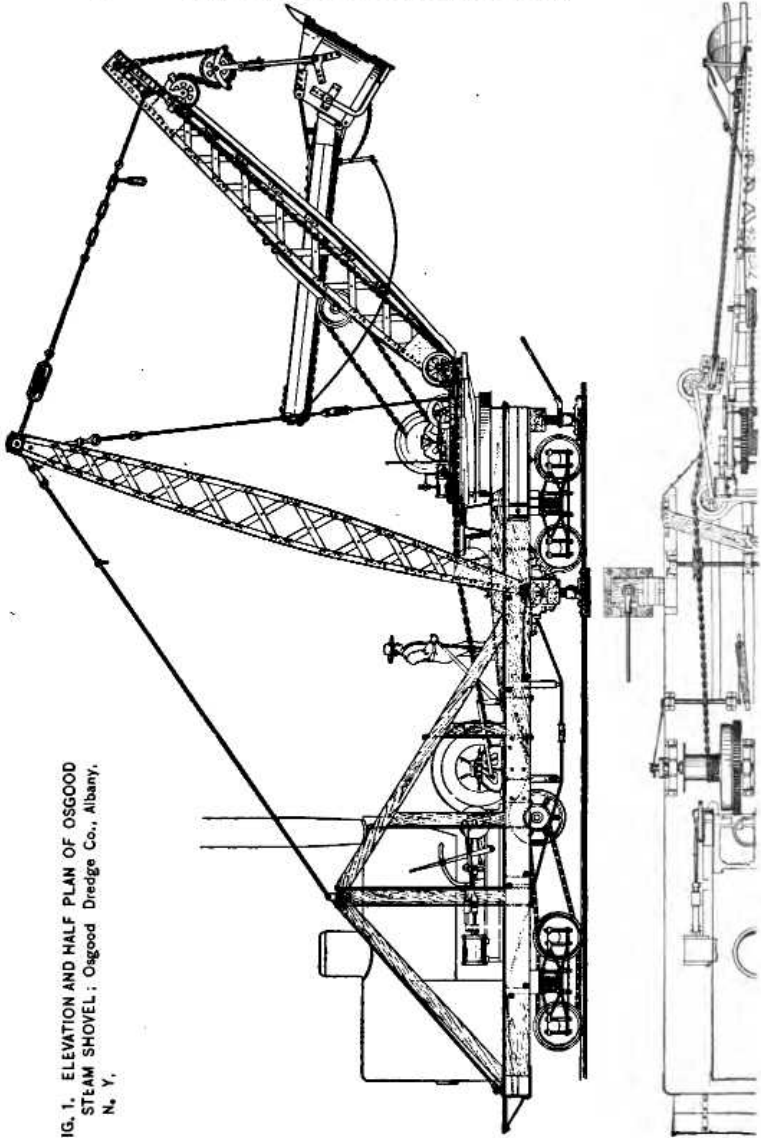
ELEVATION AND HALF PLAN OF OSGOOD
